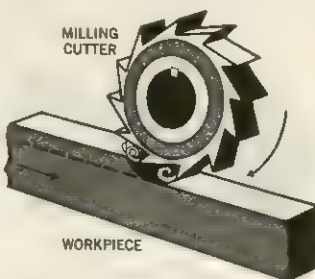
BASIC MACHINE-TOOL OPERATIONS: MILLING
